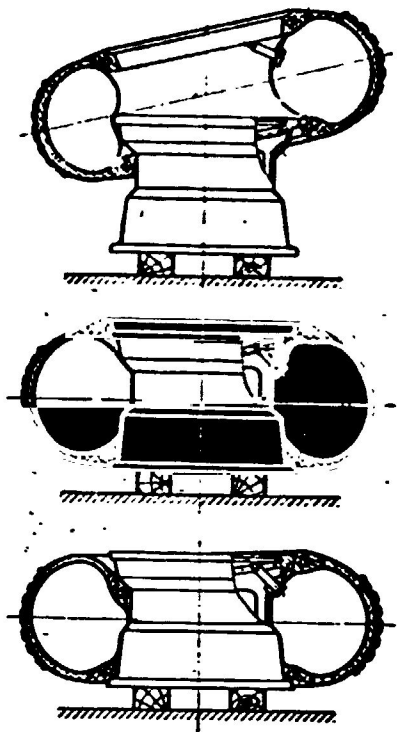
Mounting tire on wheel with nonremovable flange.
